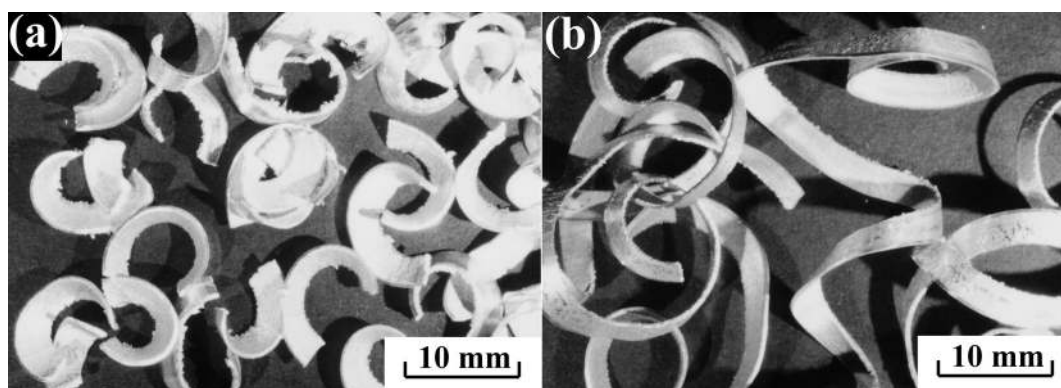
Macrographs of dry-cutting chips (a) and wet-cutting chips (b).
